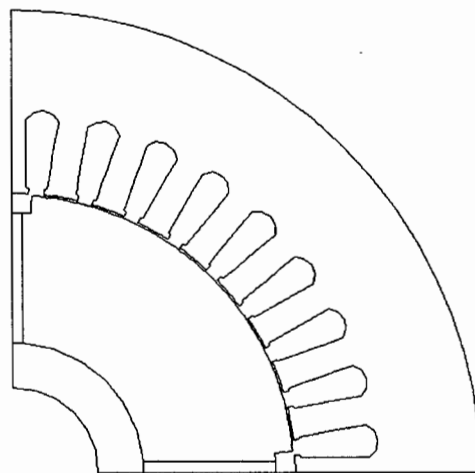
Geometric layout of optimum PM rotors designs buried PM rotor
